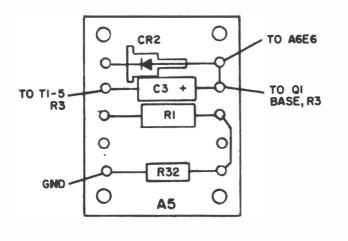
DC-to-DC Converter Assembly 3A2A5 Left View, Component Location
